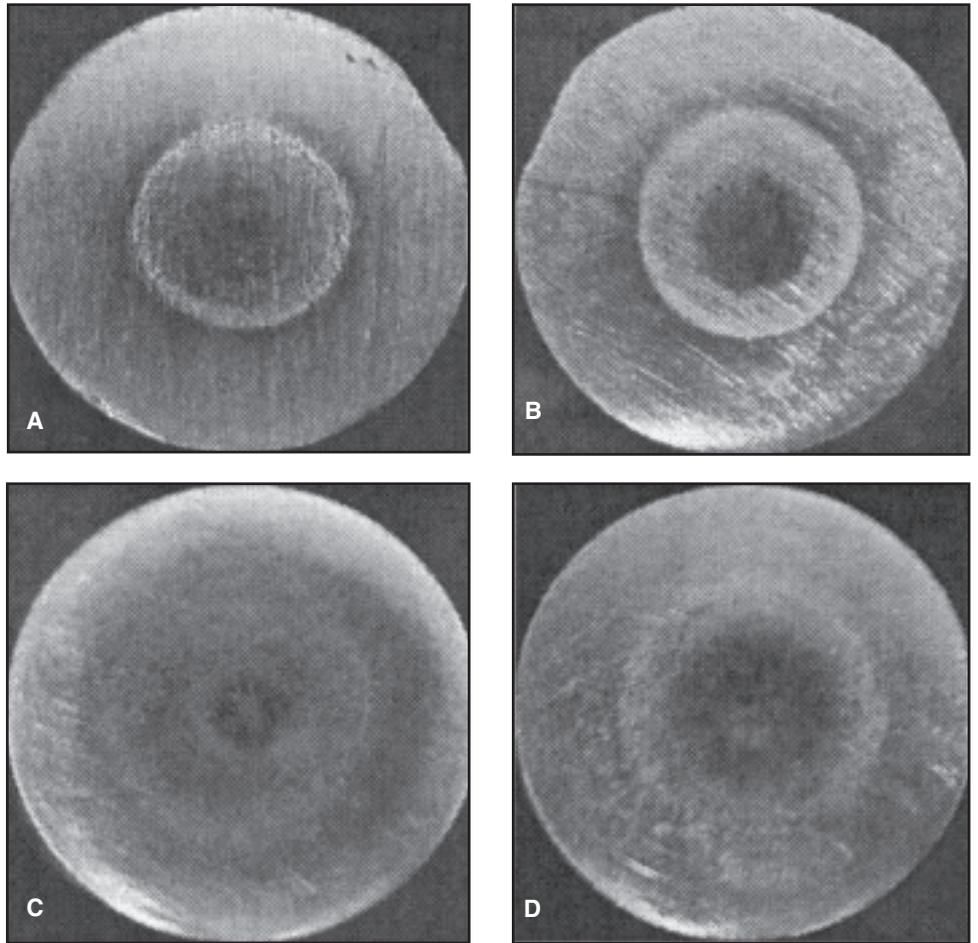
Electrode surfaces after making 60 welds on sheets of different surface conditions. A — Chemically cleaned; B — degreased; C — electric-arc cleaned; D — untreated.
